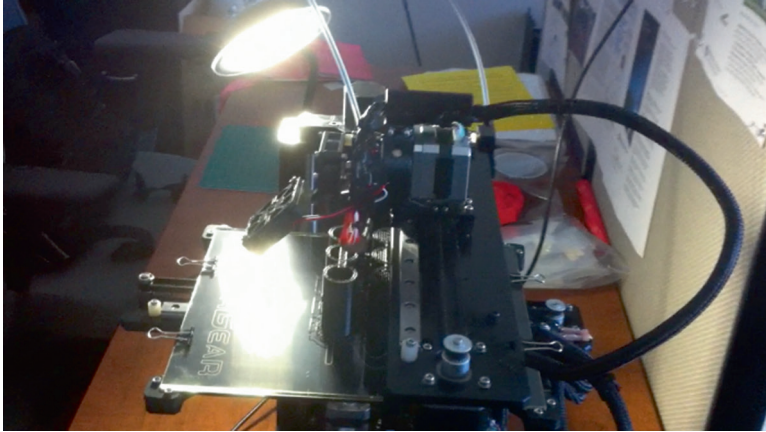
A simple 3D printer that enables printing a CAD model
